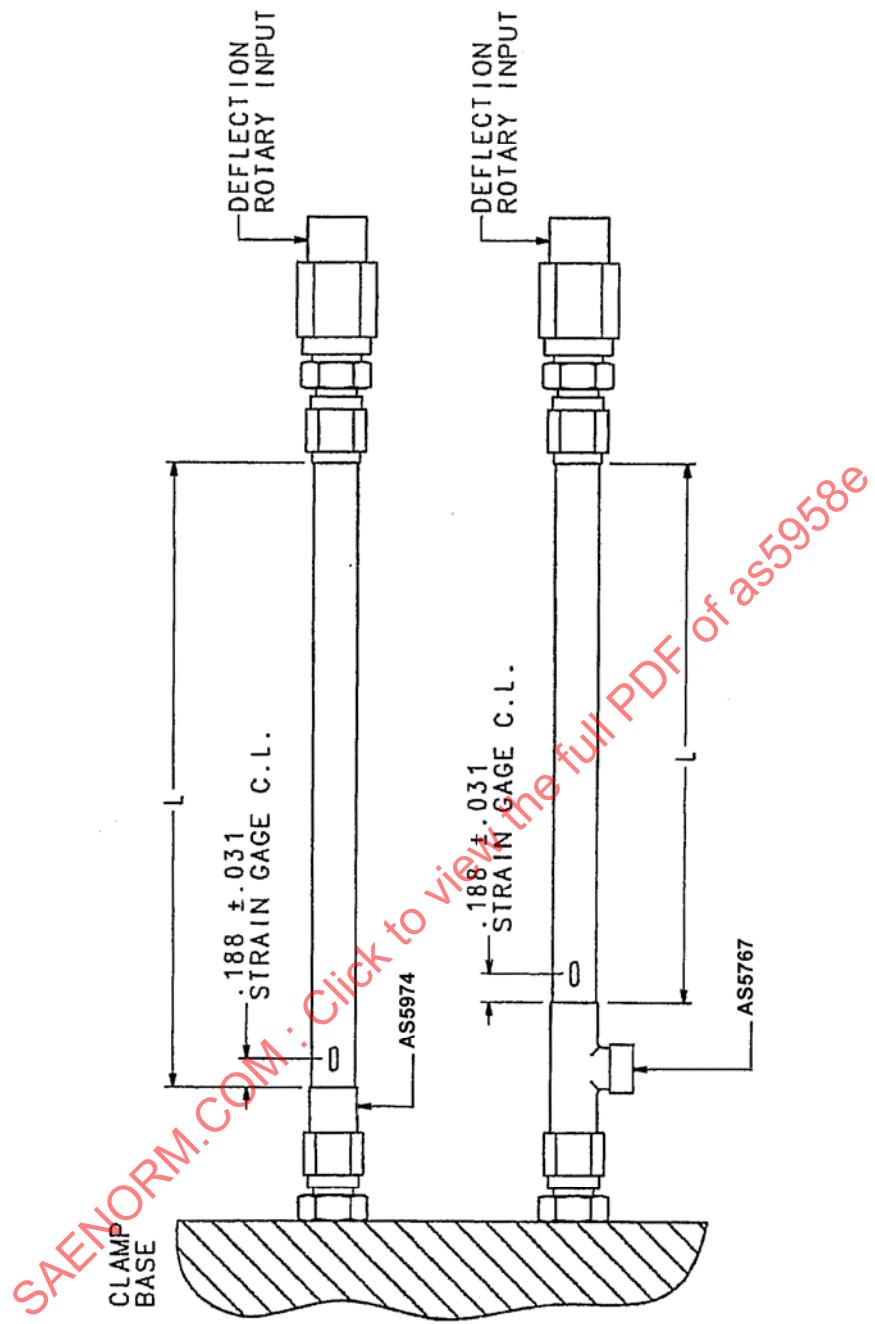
ROTARY IMPULSE TEST SPECIMEN
